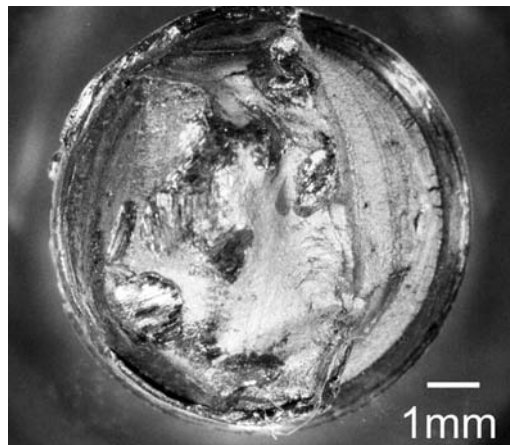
Fatigue failure of a fastener, with initiation of fatigue occurring at the threads
